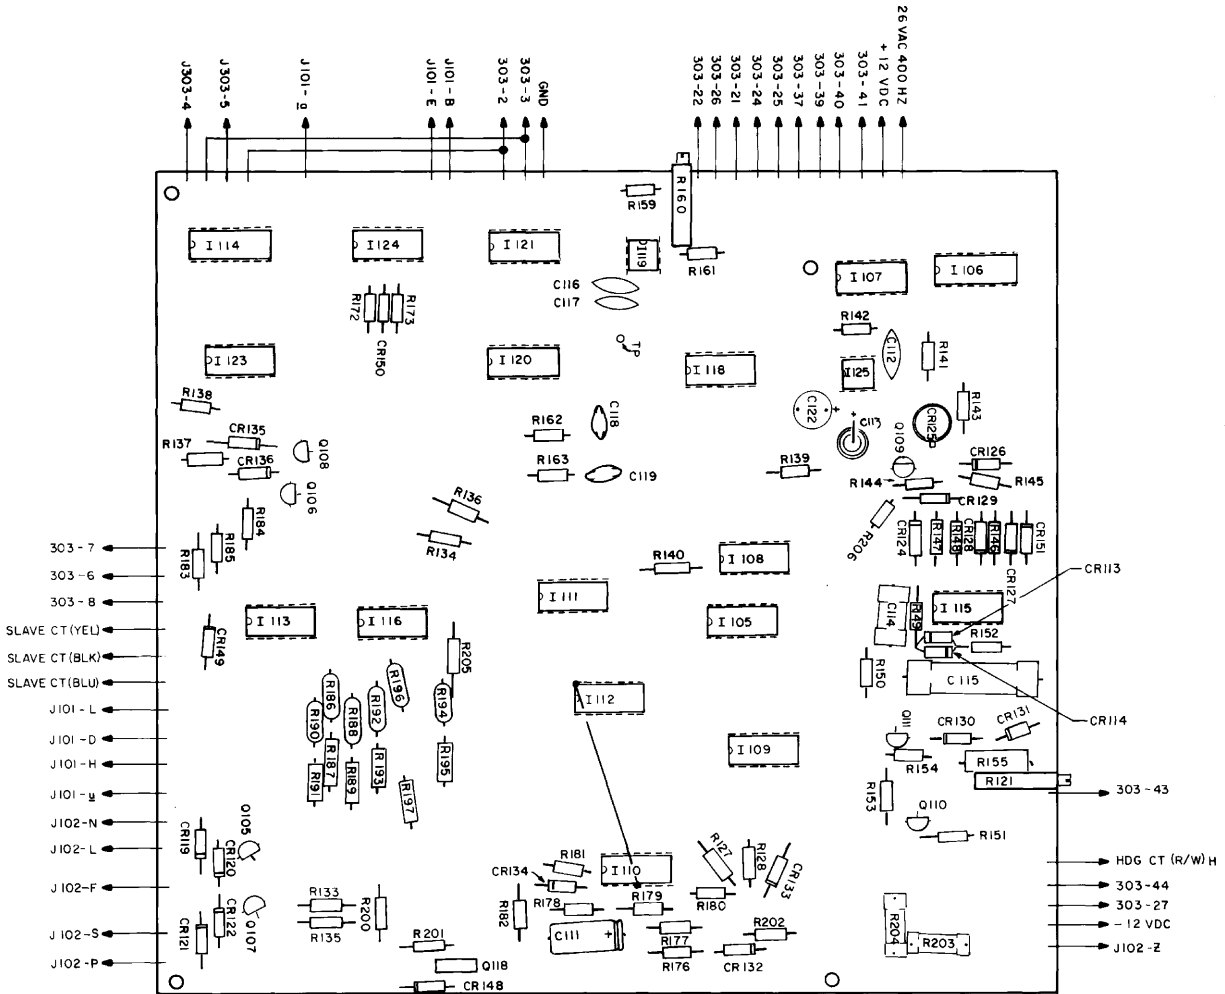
P.C. BOARD ASSEMBLY, BOARD 304, DRAWING (Dwg. 300-05988-0000 Rev. 1)
